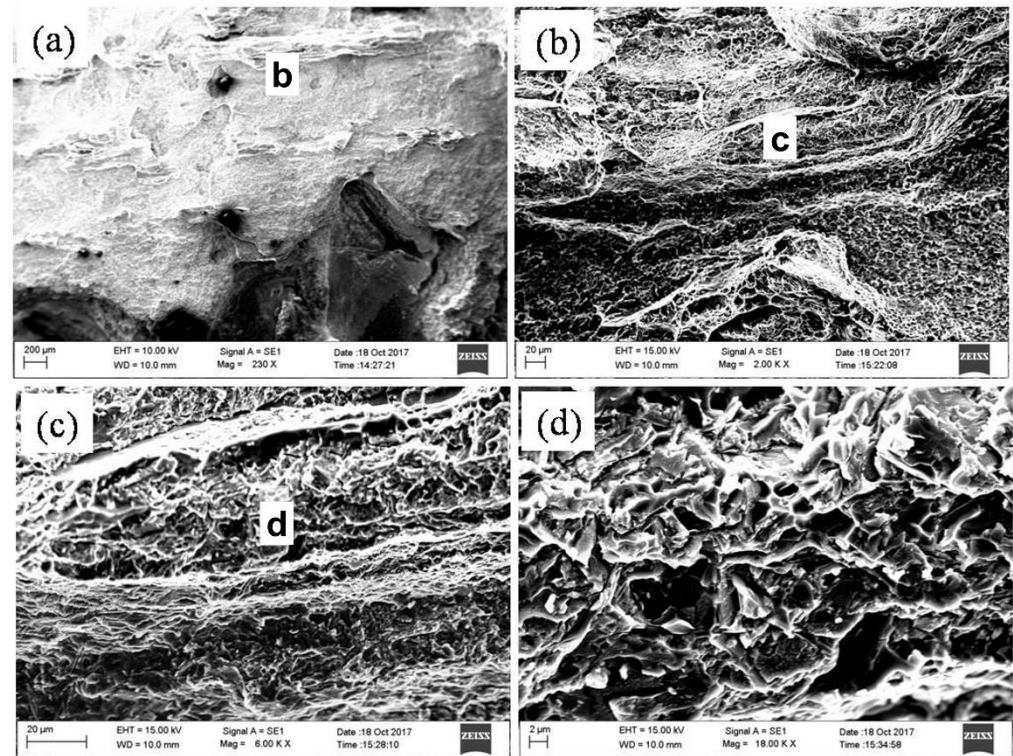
SEM images of a fractured surface of a tensile-test specimen of EB weld. (a) A region of the fracture surface at low magnification; (b–d) high-magnification fractography of zones as indicated.
